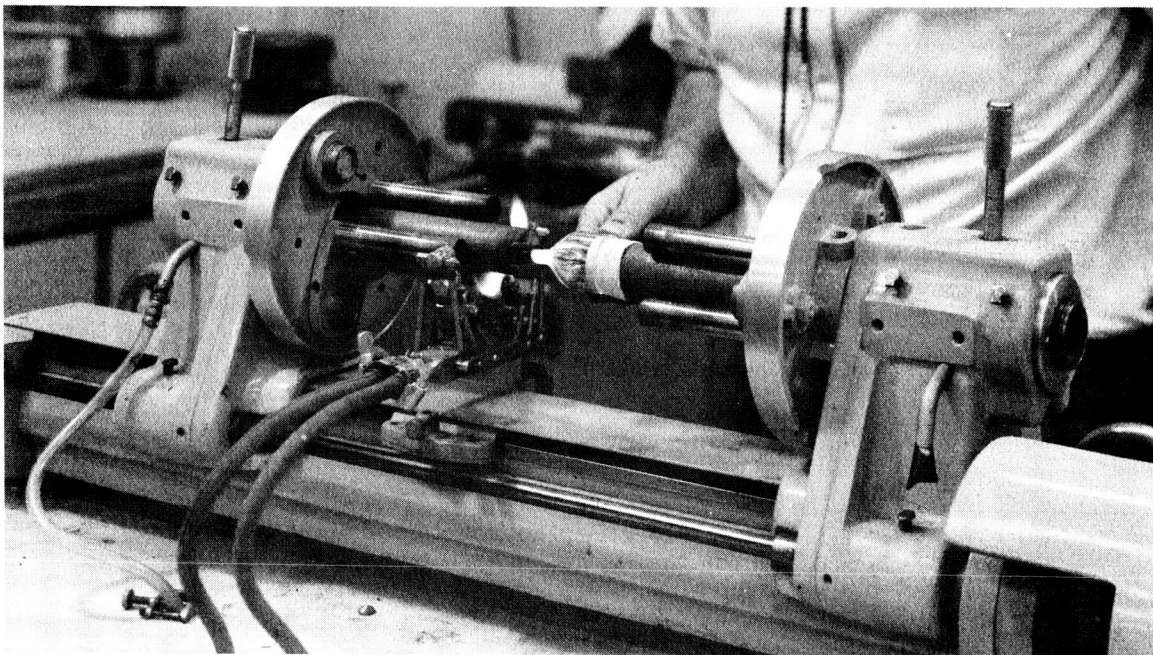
Uranium glass-tungsten electrode graded glass seals. The glass sheathed pins and the test chamber cap are heated in the glass blower's lathe, and then hot press formed into one piece.
